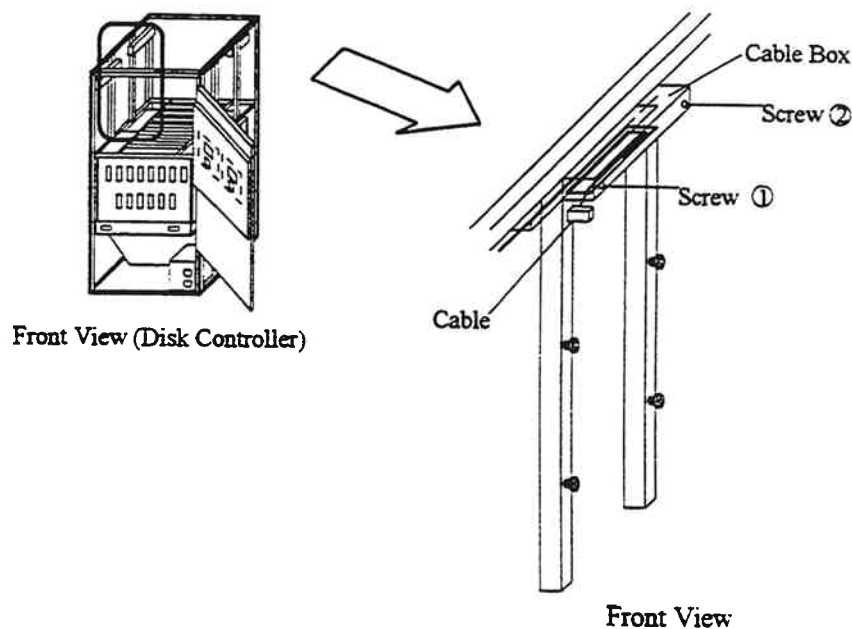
Attachment of the Cable Box
